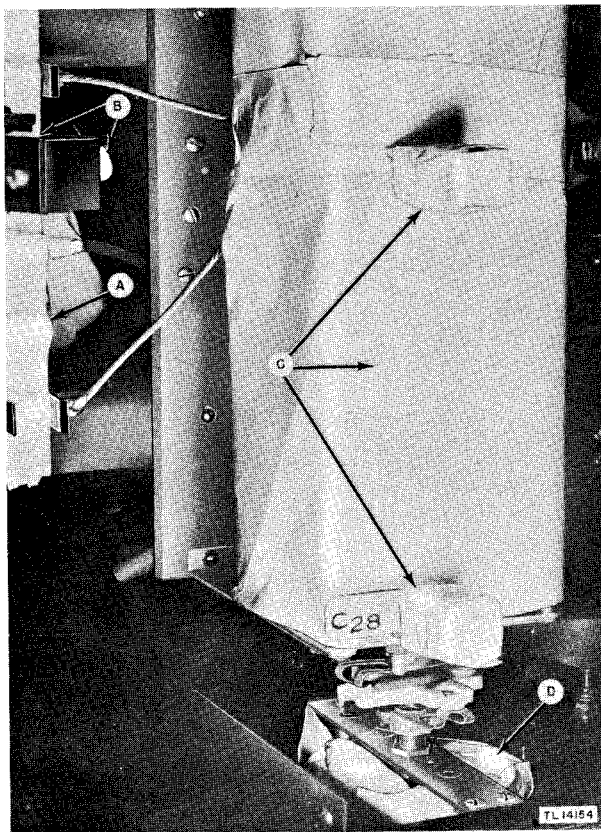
Radio Transmitter BC-610-E—top interior view of r-f chassis, showing method of masking.
